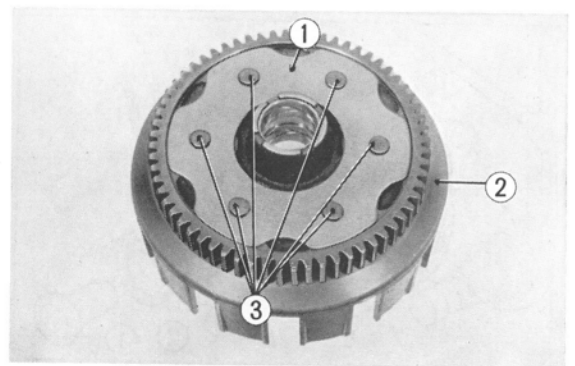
① Driven gear ② Clutch outer ③ Rivets
